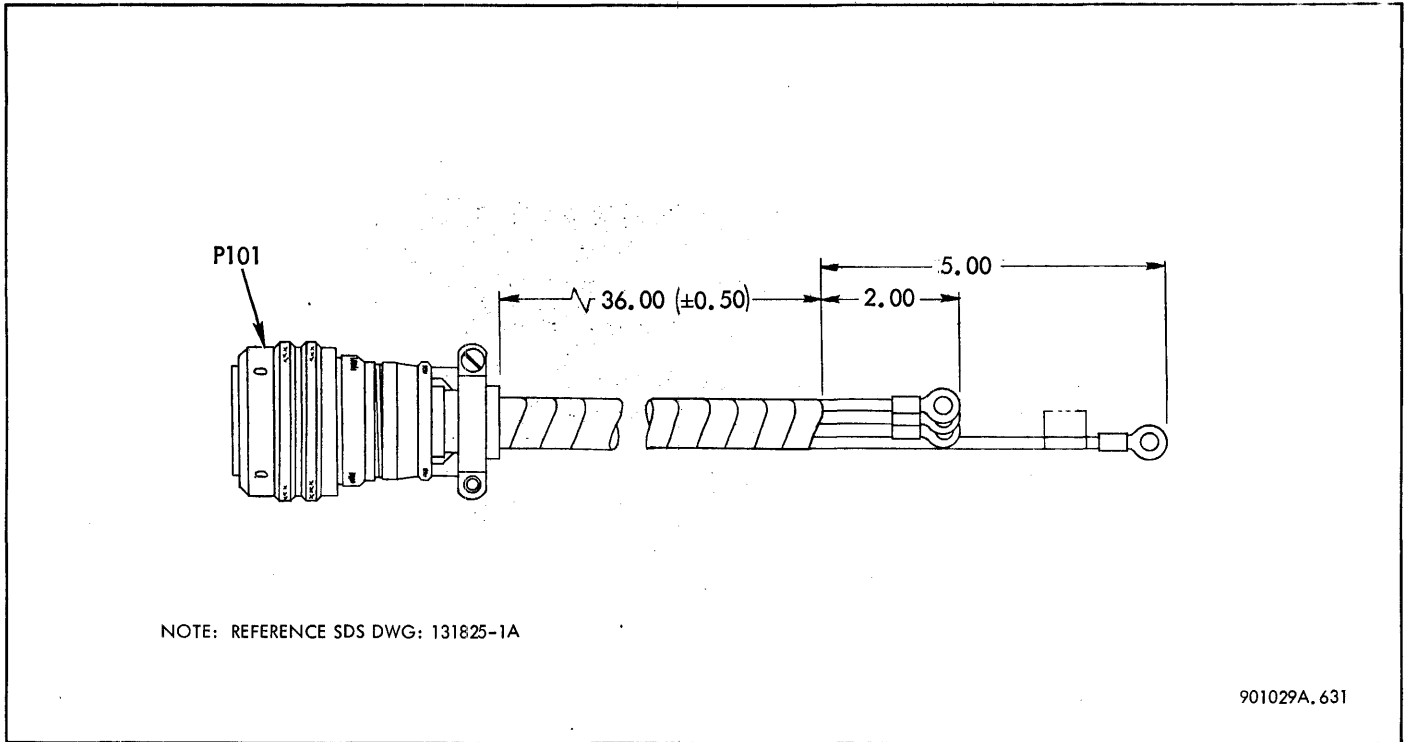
Circuit Breaker to Drum Motor Cable Assembly Parts Location
